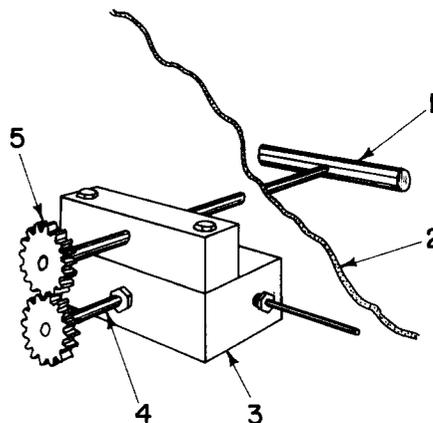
The remotely operated high-pressure valve. 1—Valve handle, situated outside the protective steel plate; 2—protective steel plate; 3—high-pressure valve body; 4—valve stem; 5—spur gear.
